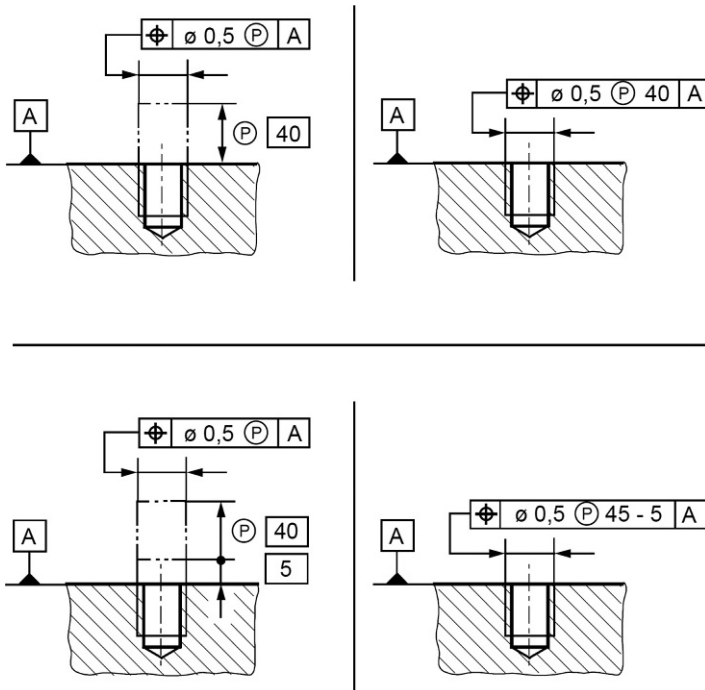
Drawing indications of projected tolerance zones; right, simplified drawing indications
